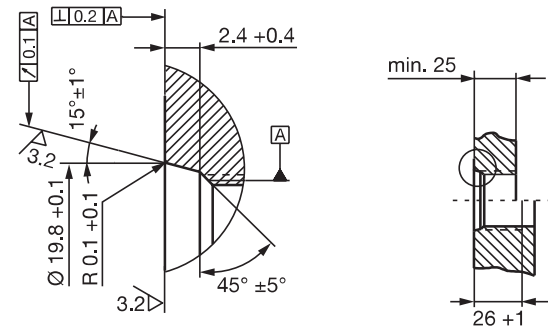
Mounting hole M18x1.5 per ISO 6149 O-ring 15.4x2.1
